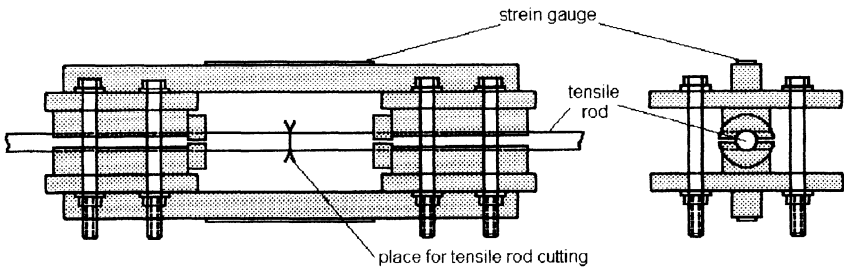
Scheme of steel fixture for placing on the tensile rod.
